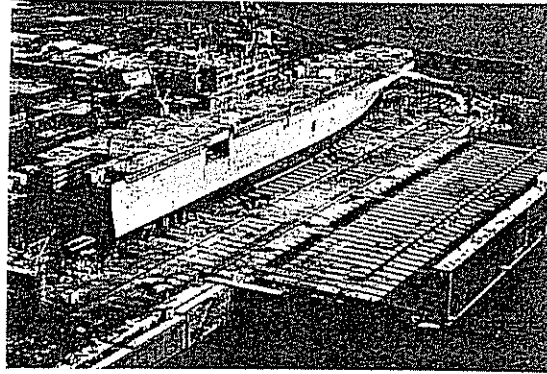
Floating dry dock with removable wing wall (courtesy Ingalls Shipbuilding)
